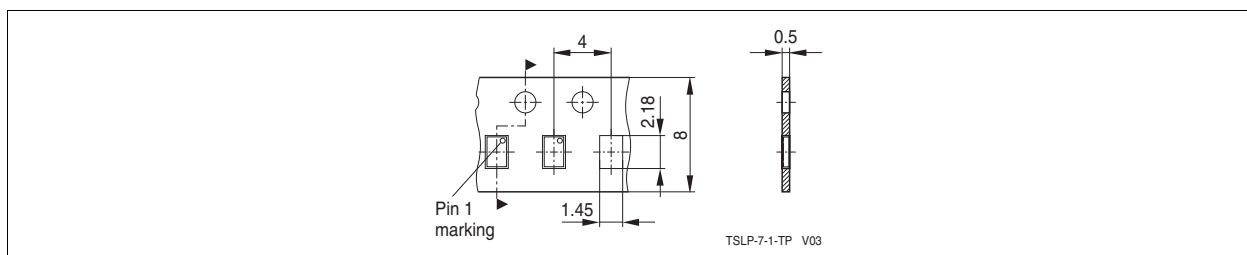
Tape & Reel Dimensions (Ø reel 180, pieces/reel 7500)
